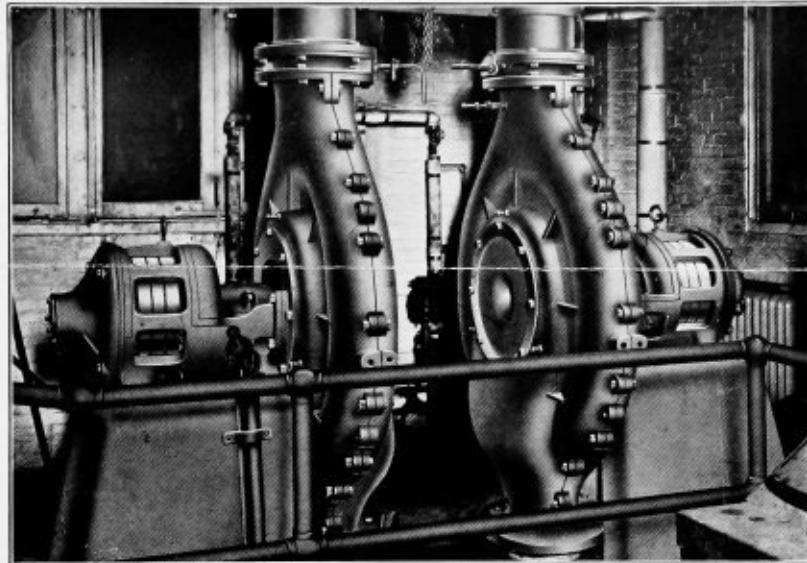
Typical centrifugal compressor installation. Each machine delivers 3300 cu. ft. of free air per minute at 1½ lb. pressure. Machines are bottom intake, top discharge
